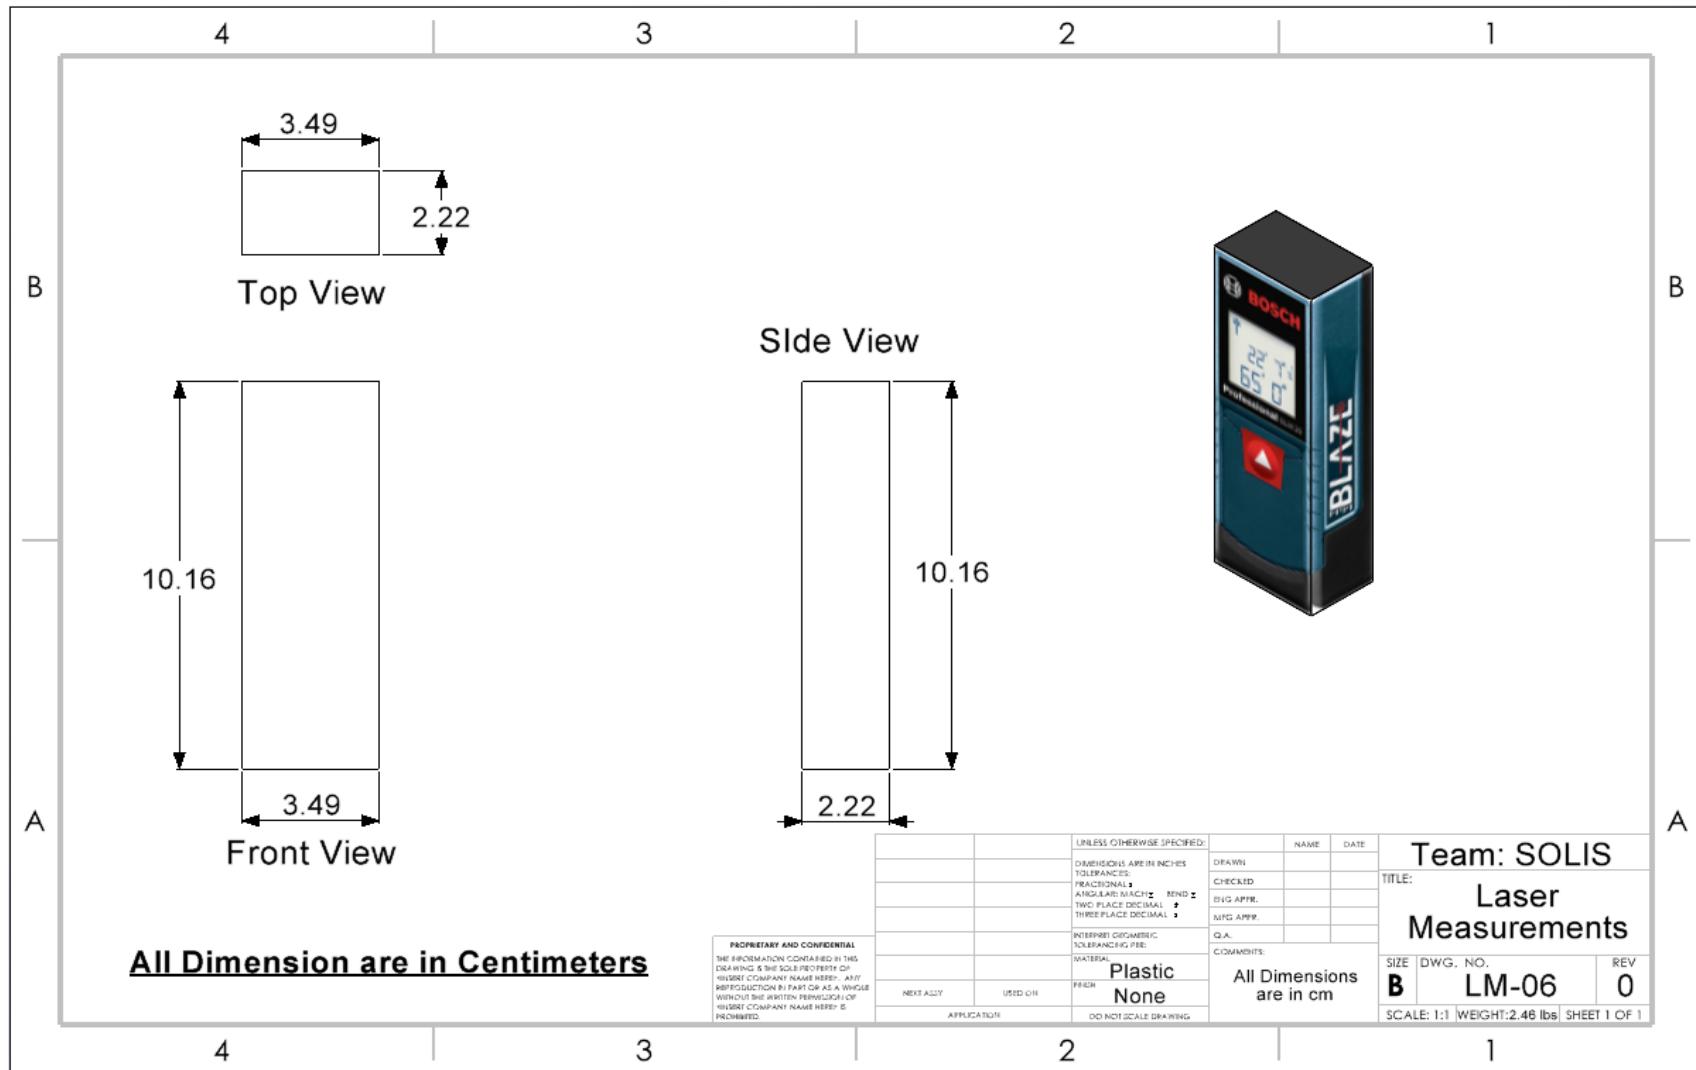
CAD Draft Sheet of the Laser Measurements Device.
